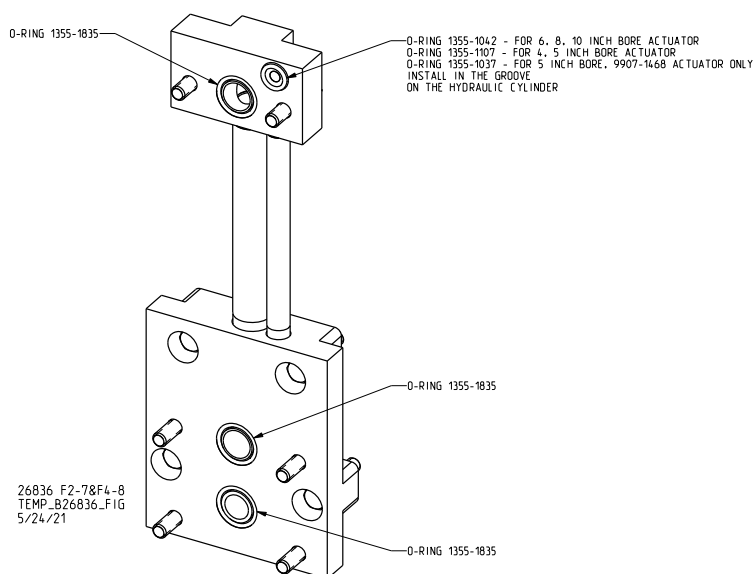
Bridge Manifold O-Ring Locations (Cylinder Side)
